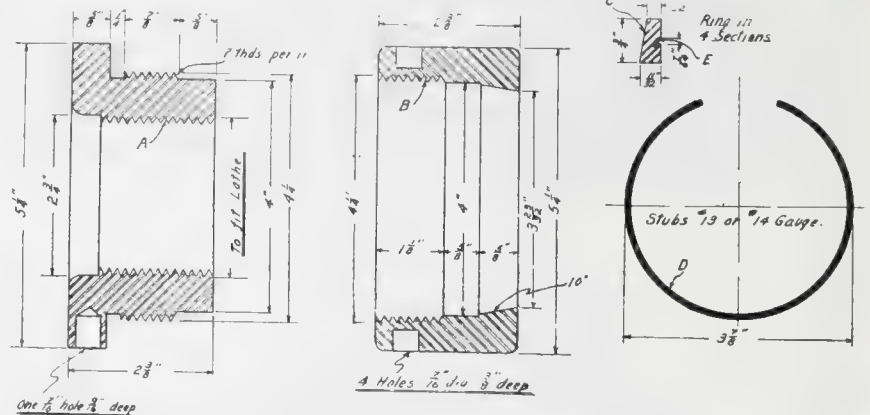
CHUCK FOR HOLDING BUTT END OF SHELL WHILE BODY OF LATTER IS BEING GROUND.
